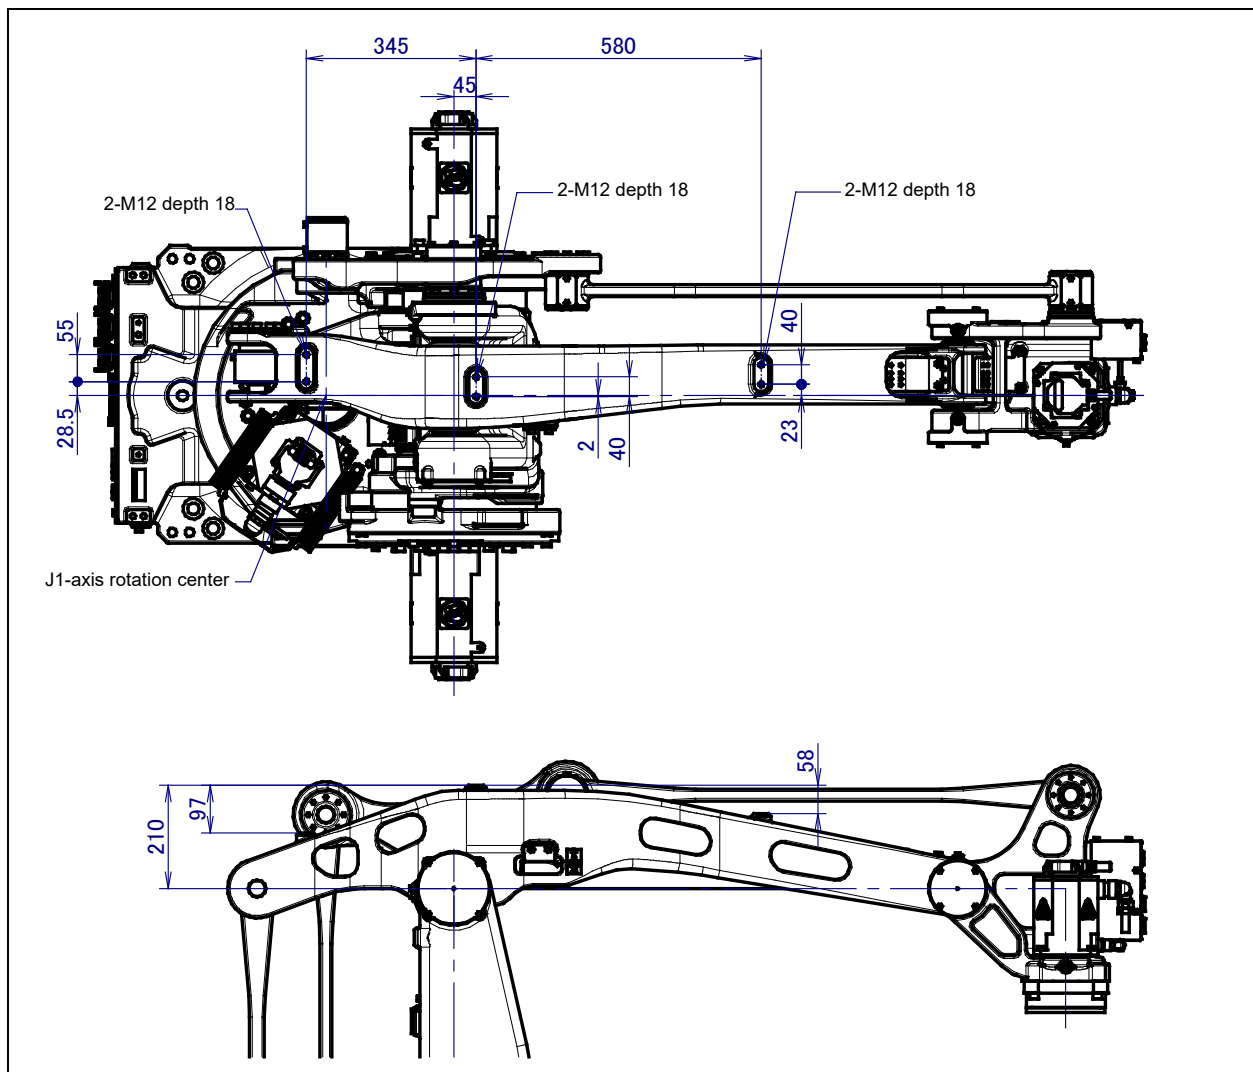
(a) Equipment mounting faces (M-410iC/110)
